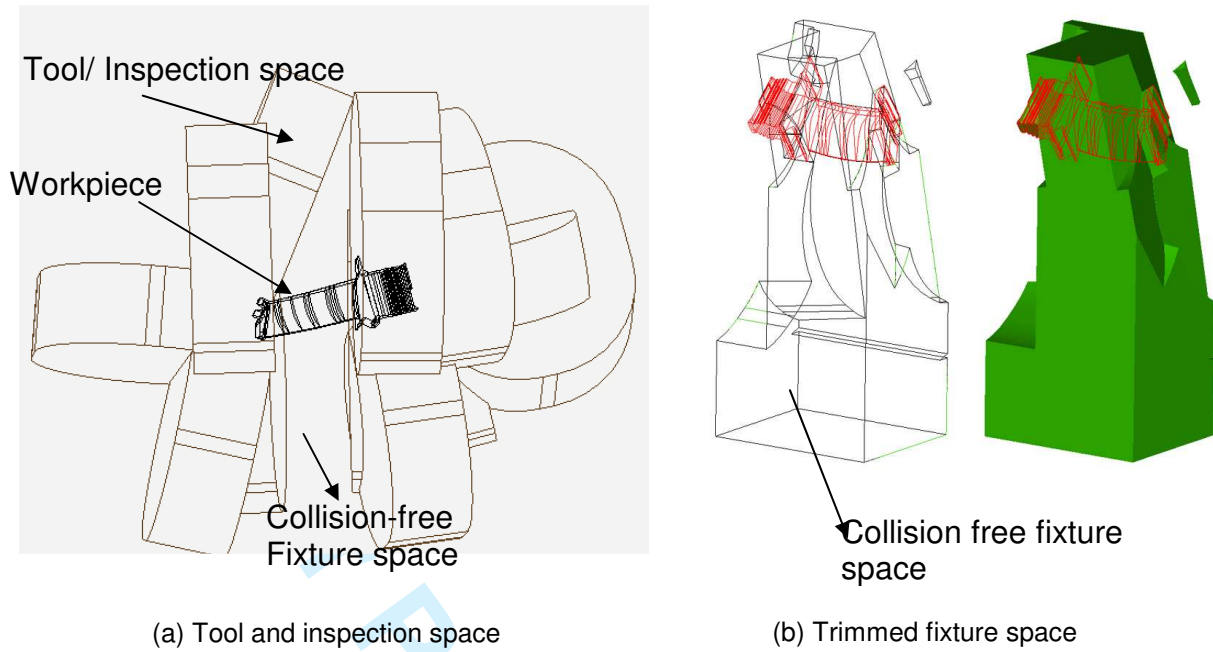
Fixture collision free space design for the T800 turbine blade (Geldart et al 2002)
